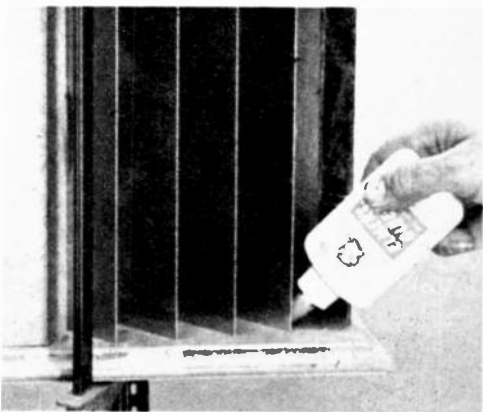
Aluminum vanes are set in grooves cut in top and bottom. To be sure there are no rattles, secure with glue and silicone rubber adhesive.
